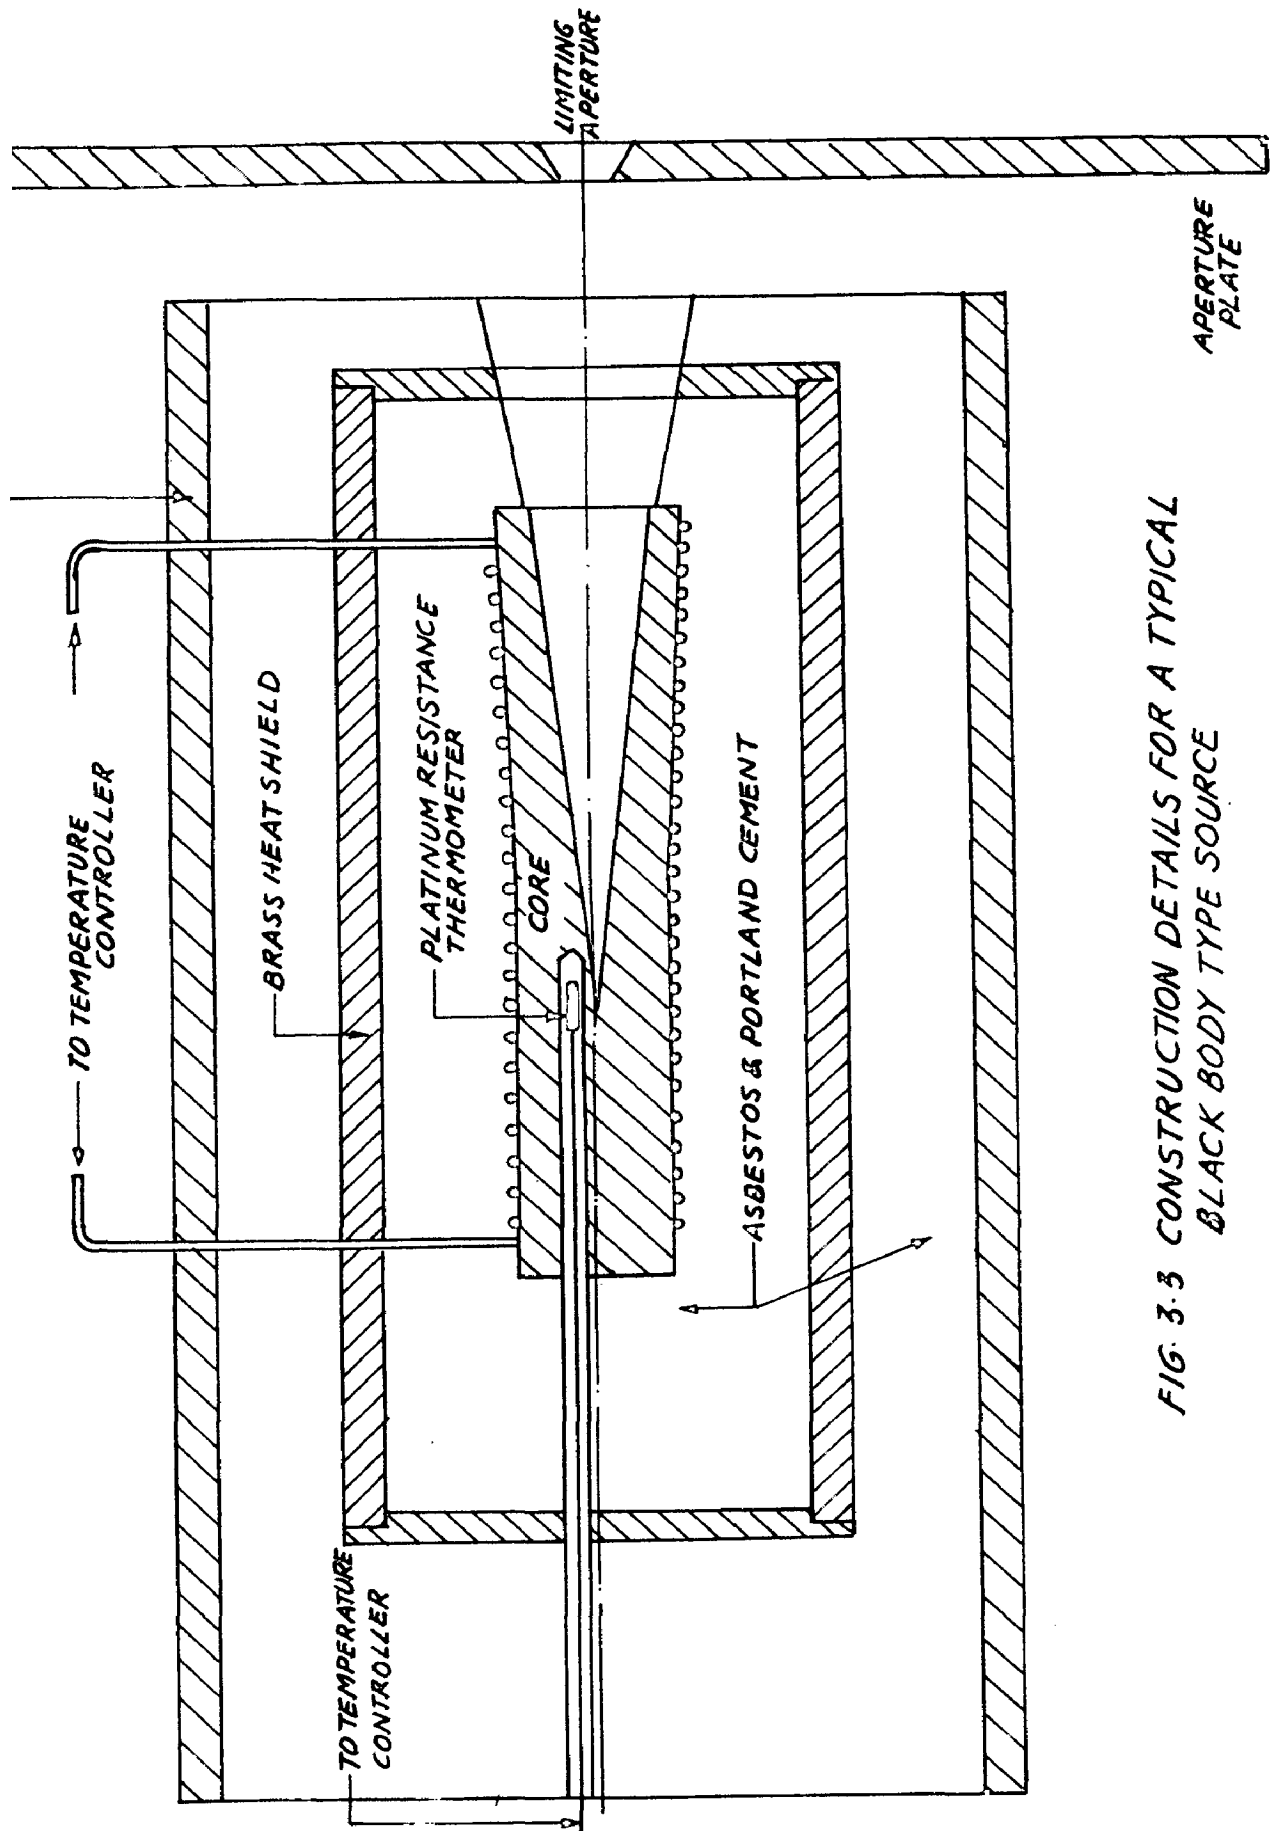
CONSTRUCTION DETAILS FOR A TYPICAL
